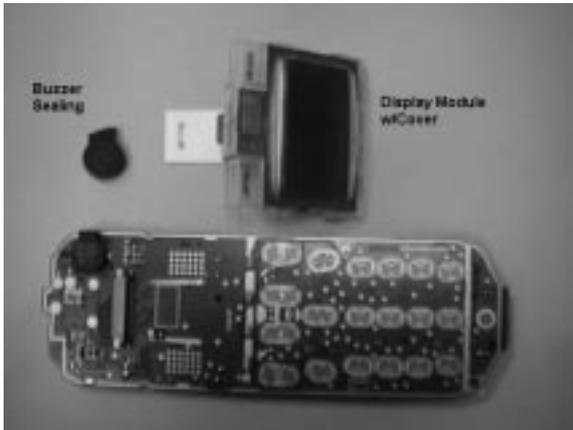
Disassemble Control Board Assy – STEP 2
